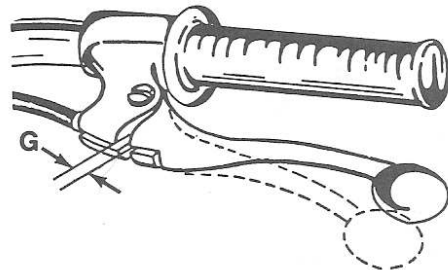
Brake lever free play (G) should be 4-5 mm (0.16-0.20 in.).
